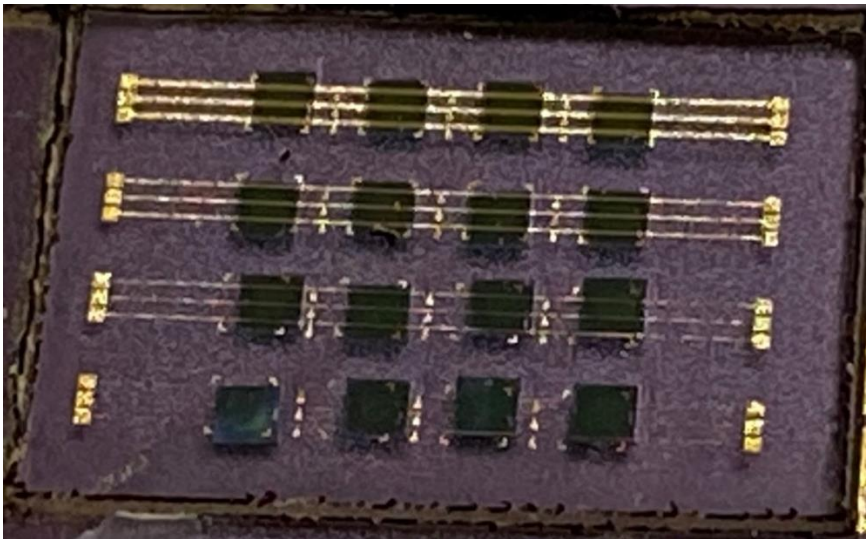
Fabricated sample of flexible wiring with a passivation layer
